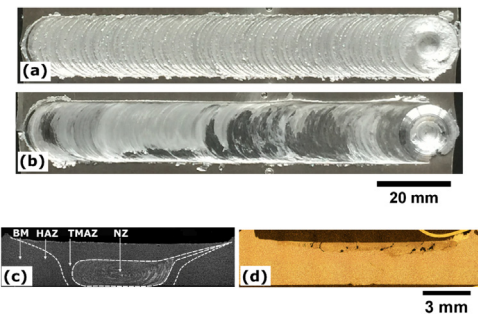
(a, b) Surface morphologies of W1, and W7 FSW joints, (c) typical cross-weld macrostructure (W5), and (d) cross-weld macrostructure of W8. (AS on the right).
